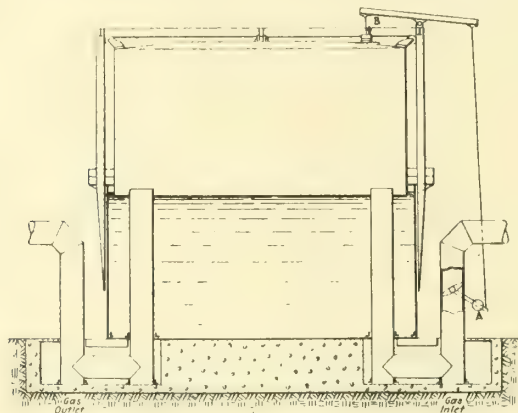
ARRANGEMENT OF REGULATING VALVE FOR GAS HOLDER.
